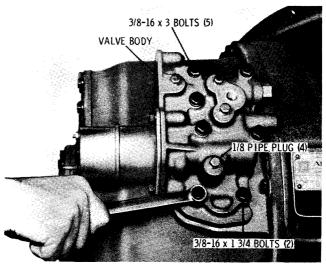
Removing (or installing) drive clutch scott valve assembly
